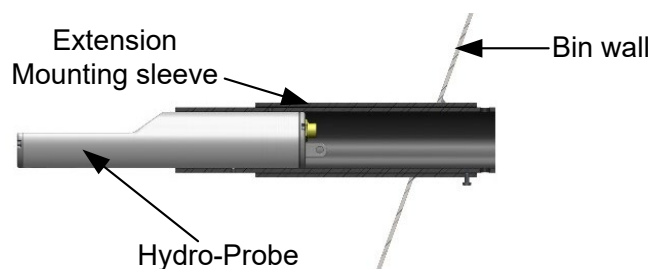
Hydro-Probe installed in an Extension Mounting Sleeve
